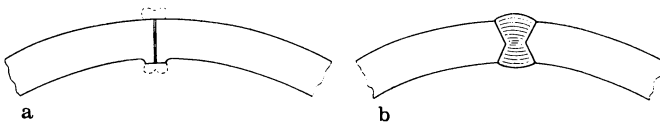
Cross-sections of joints, schematic. a Electric-resistance welded (ERW) longitudinal pipe seam with incompletely removed internal bead; b submerged arc-welded (SAW) joint
